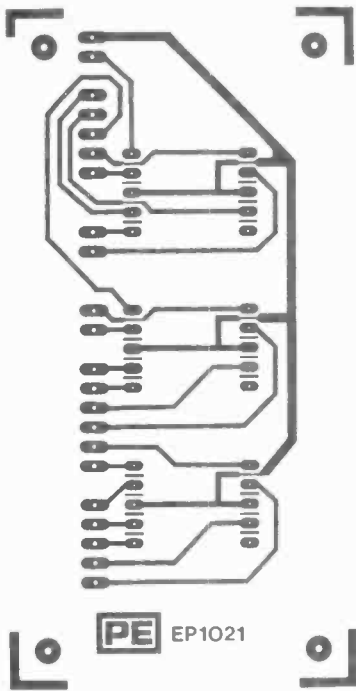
(left). Printed circuit board layout (actual size) of the 0.5 in. display board
